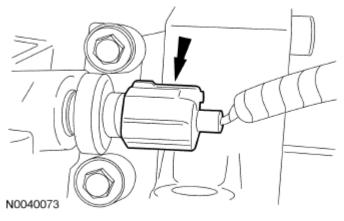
Locating Engine Oil Pressure Switch Electrical Connector Courtesy of FORD MOTOR CO.
